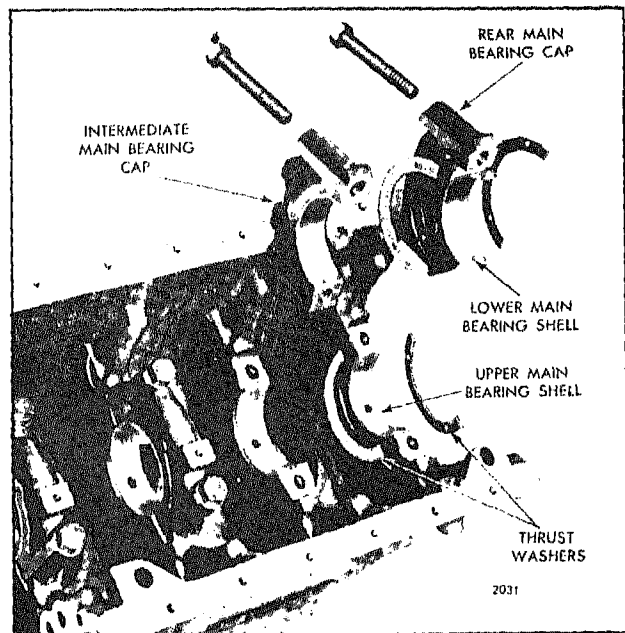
Main Bearing Shells, Bearing Caps and Crankshaft Thrust Washers -- In-Line Engines
